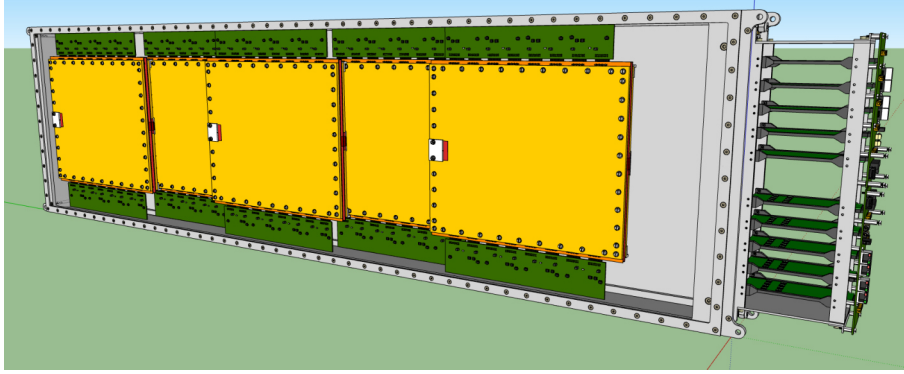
Technical drawing of a mTOF M4 module, holding 5 MRPC3a counters.
